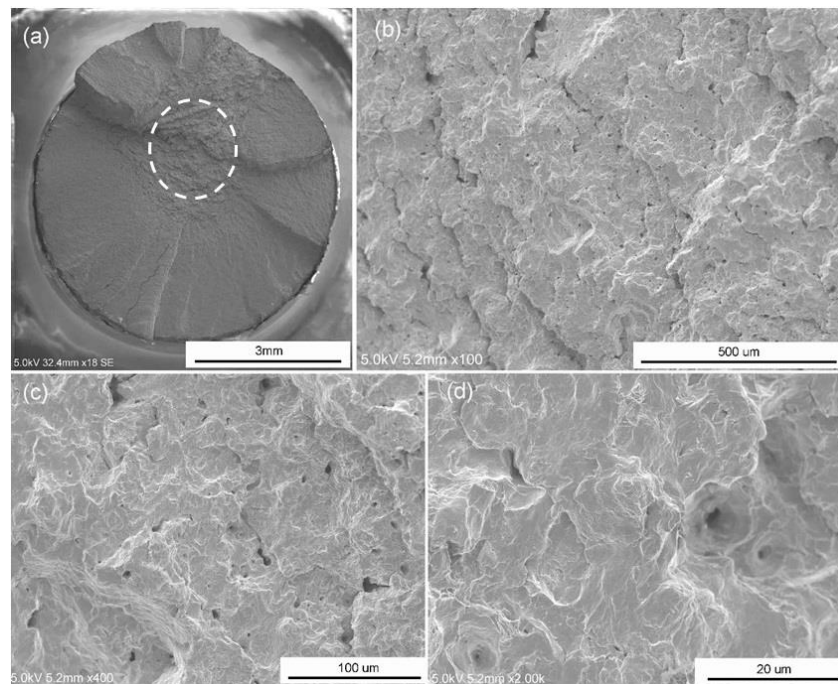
SEM of fracture surface after corrosion-fatigue test: (a), entire fracture surface; (b), dimple zone 100X; (c), dimple zone 400X; (d) dimple zone 2000X.
